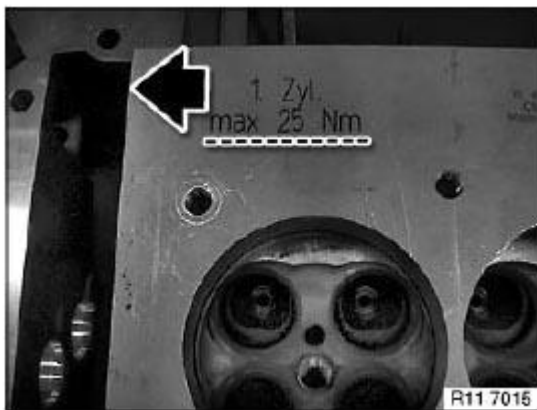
Mounting Of Special Tool (11 4 341) On 1 Cylinder
